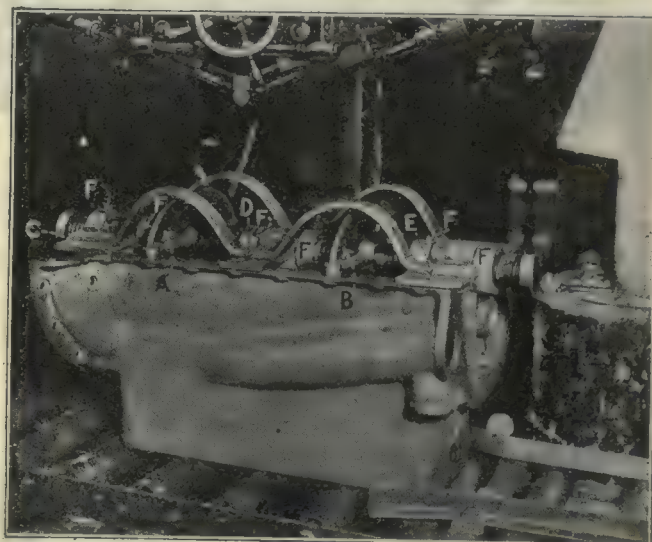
FIXTURE FOR BABBITTING MAIN BEARINGS
